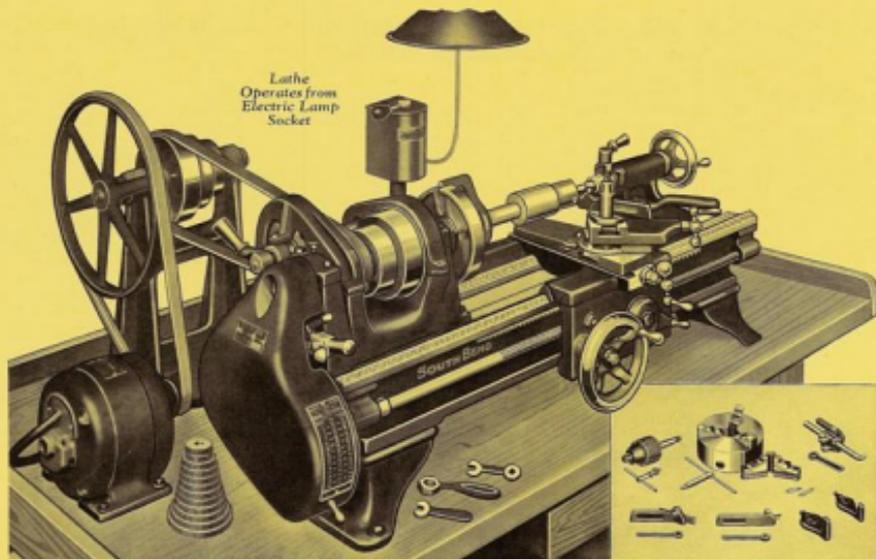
The New 9-in. x 3-ft. Junior South Bend Lathe in Operation Making a Replacement Bushing. Small Illustration Shows the Bushing Servicing Equipment for Lathe as Listed and Priced Below.
